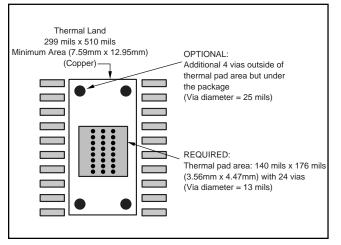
20-Pin DWP PowerPAD PCB Etch and Via Pattern.
